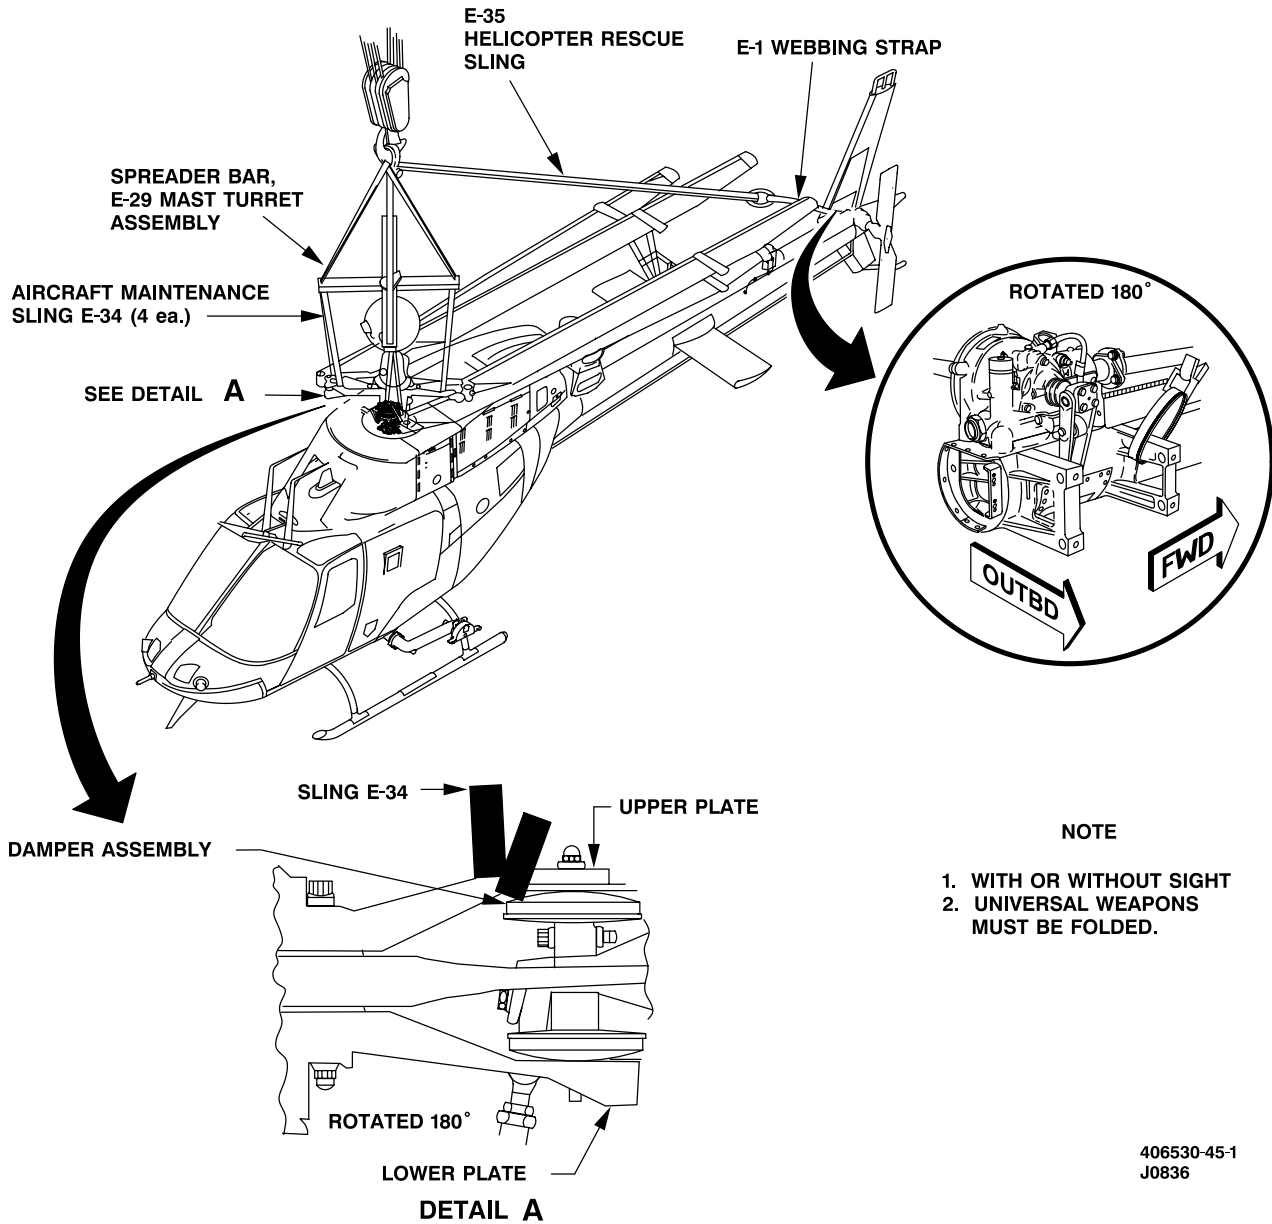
Rotor Head Suspension Rigging Configuration — (LO/LO), for Vessel Shipment
